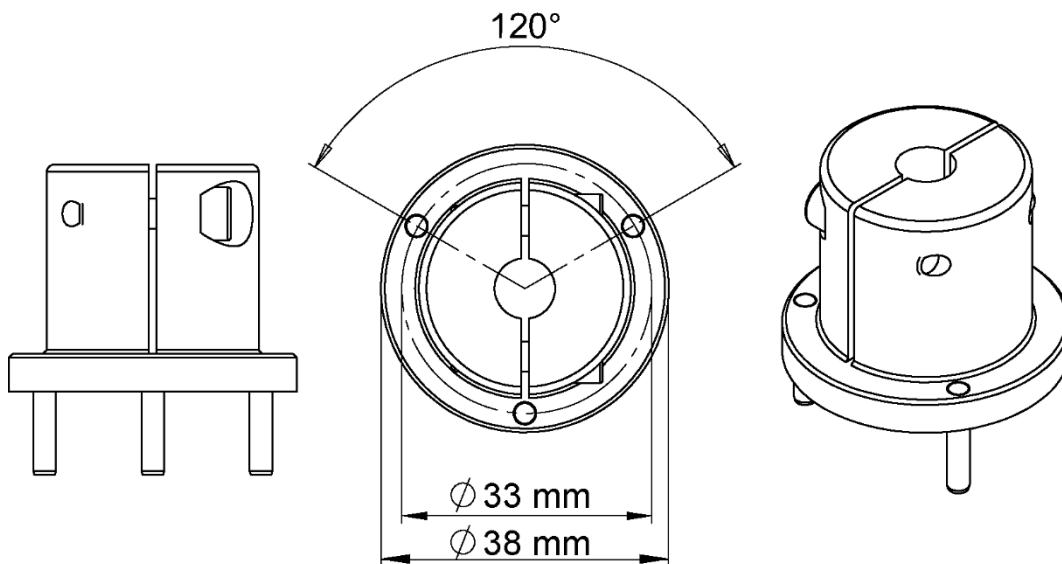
Dimensions of the dial gauge holder for determining the dimensional accuracy
